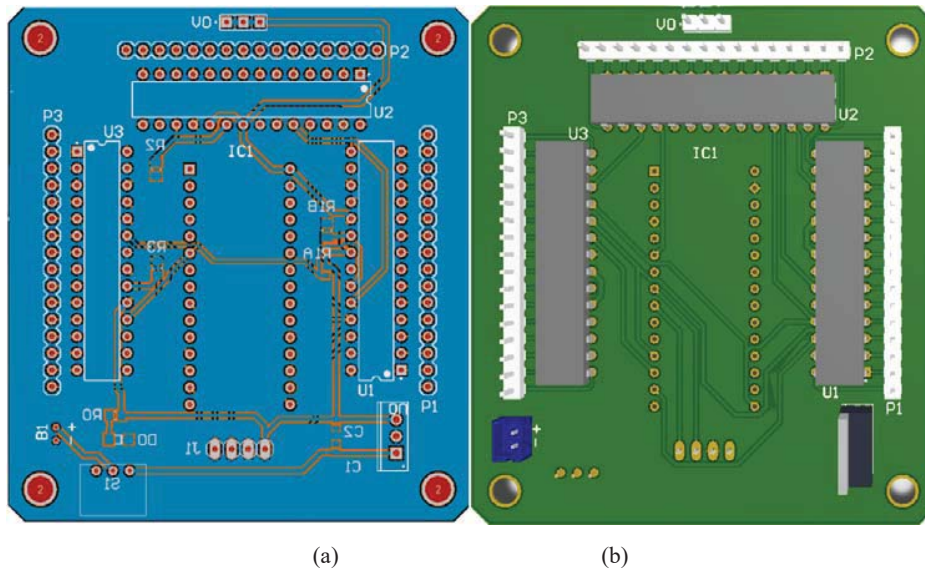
Haptic jacket PCB design (a), 3D render (b)
